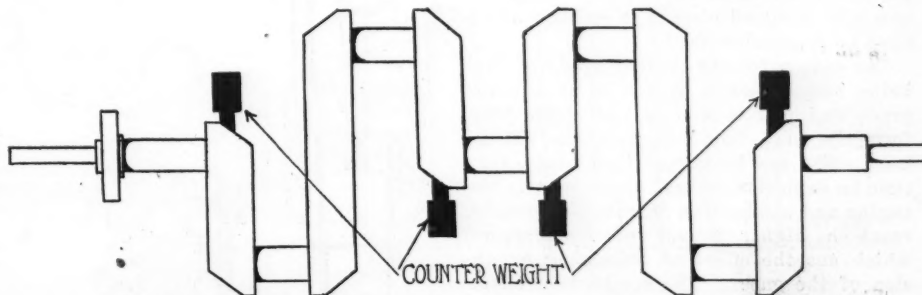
Typical counterbalanced crankshaft, showing counterweights
